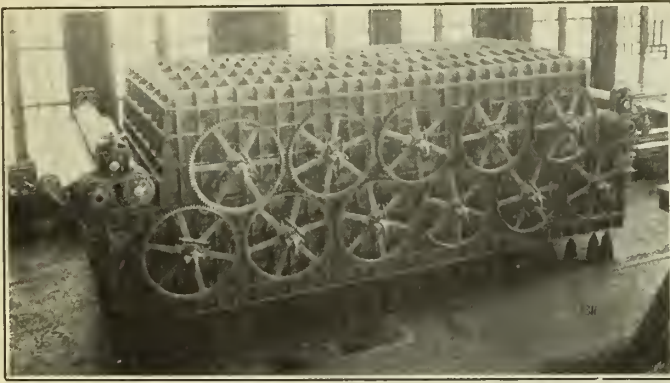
Back View of Vacuum Dryer showing Roof Construction and Gearing.
